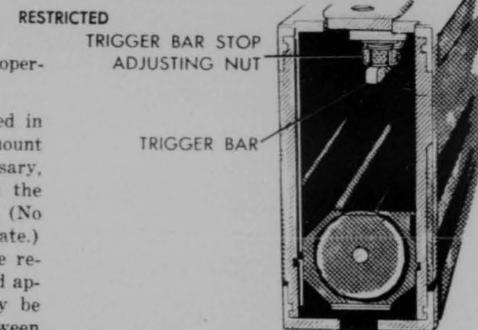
Trigger Bar Adjustable Stop Assembly, Assembled in Receiver—Rear View.
